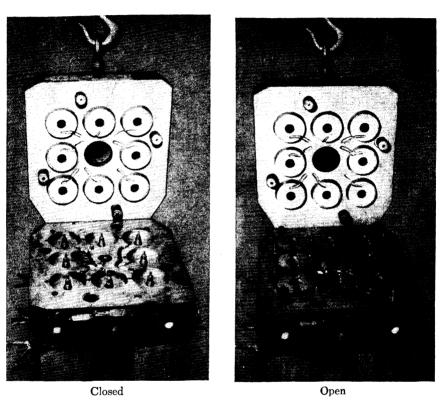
Die designed for angular ejection. Such dies often can be used to advantage for casting small parts with undercuts or threads.
